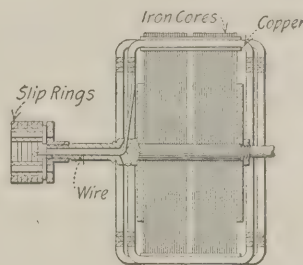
SECTIONAL VIEW OF WOUND ROTOR
